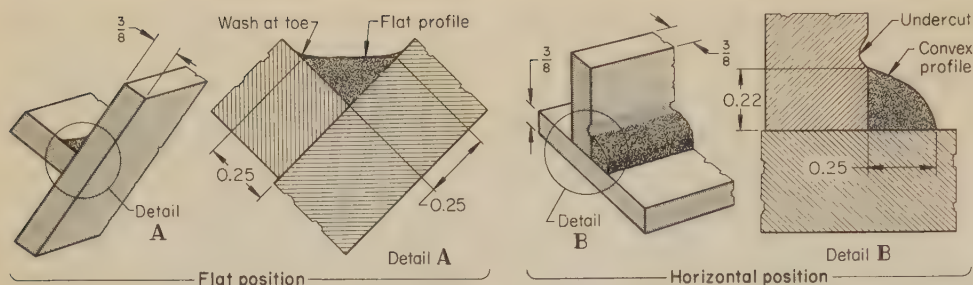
Comparison of profiles and leg lengths of fillet welds made in the flat position and the horizontal position. Note undercut above horizontal-position weld.
